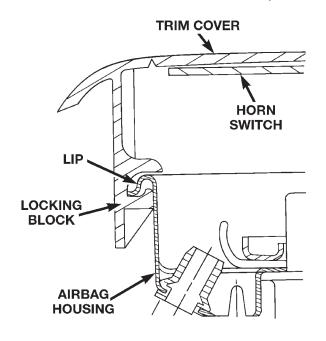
Driver Side Airbag Trim Cover Remove/Install
